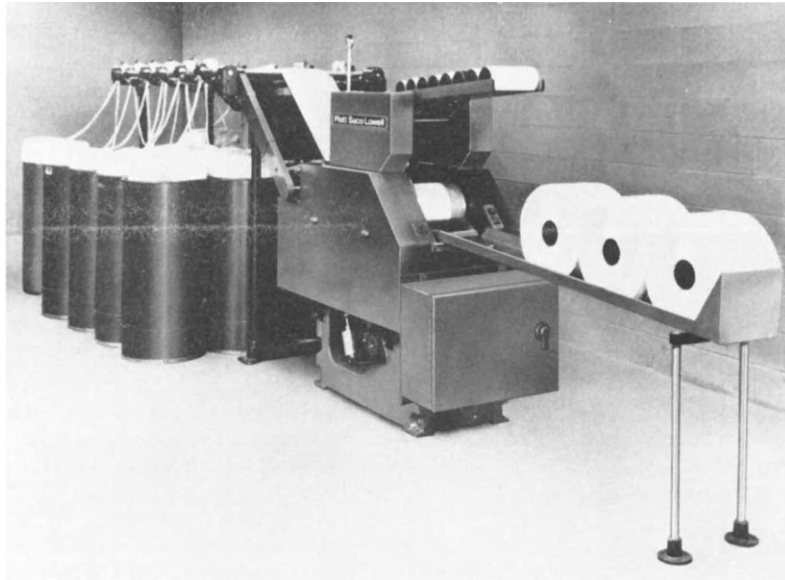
Pre-comb lap forming machine. This particular machine, which does not incorporate a drafting zone, assembles up to 24 drawframe slivers to form a compact lap ready for the creel of the cotton combing machine. Empty
